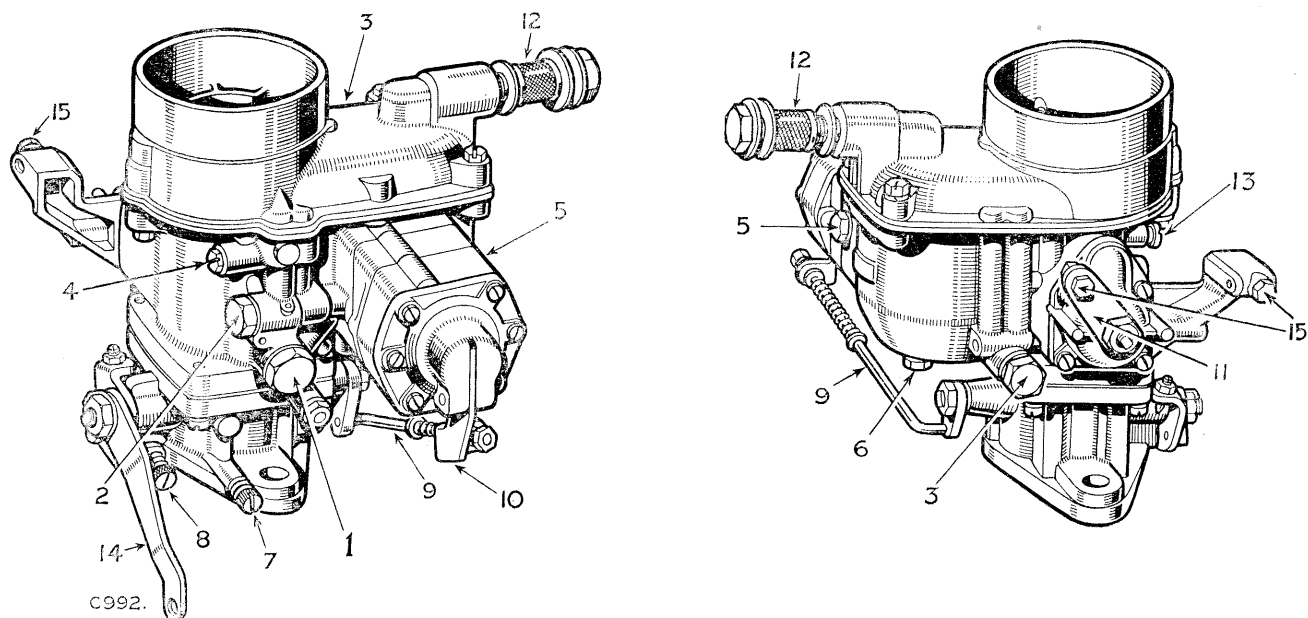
Carburettor jets and controls, 2 litre Petrol
